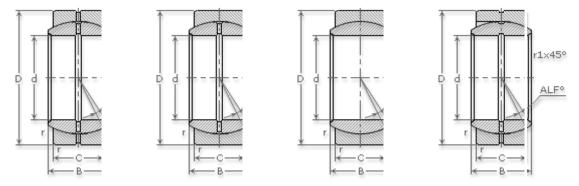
Spherical bearings : ШП (ШМП), ШСП, ШСП...К, ШСЛ types
